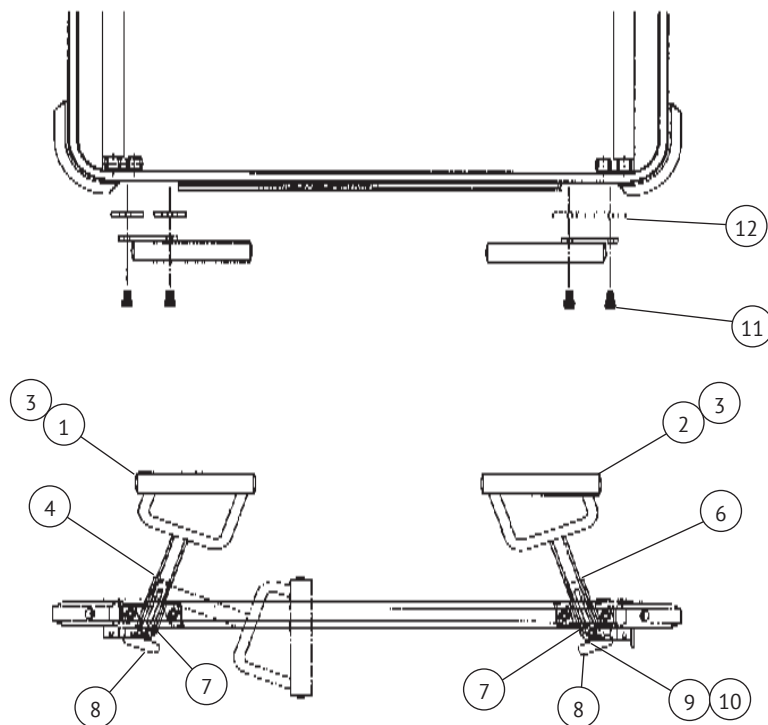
PUSH BAR ASSEMBLY (AFTER 6/1/99)
